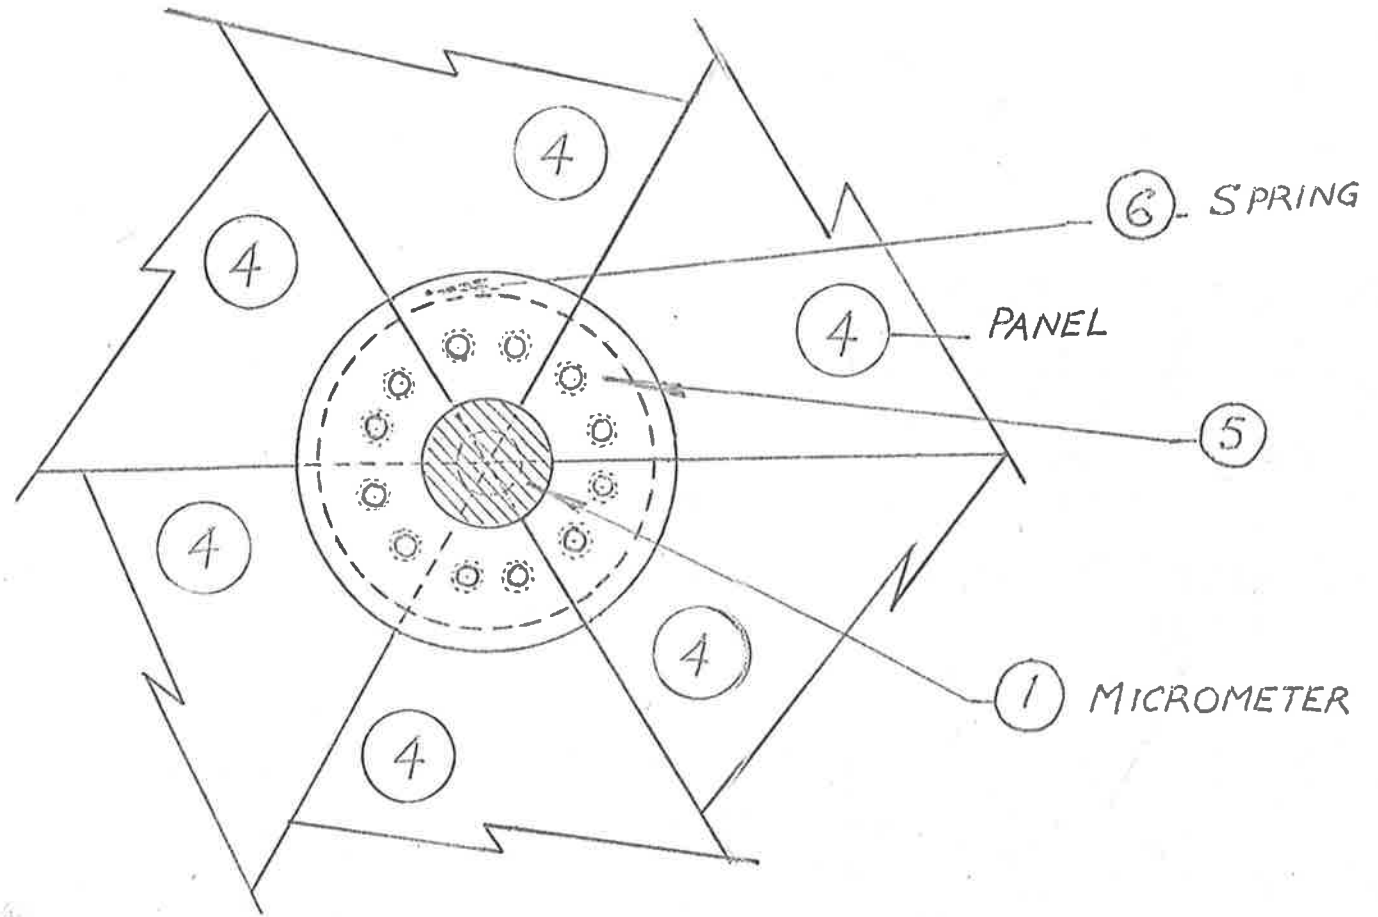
MICROMETER ASSEMBLY — SECTION AA .
